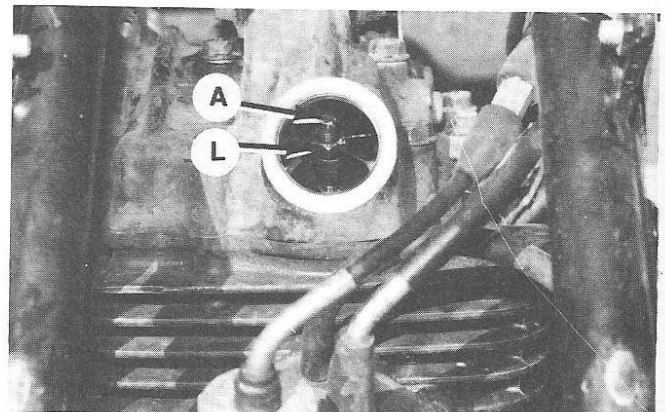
Clearance between valve stem and adjusting screw (A) should be 0.08-0.13 mm (0.003-0.005 in.) for both intake and exhaust valves.
